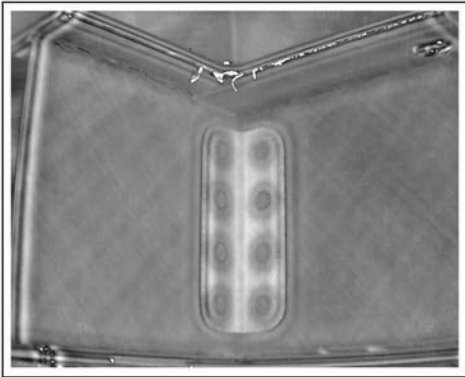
Thermal inspection results for cruciform 1, rivet 1 top.
